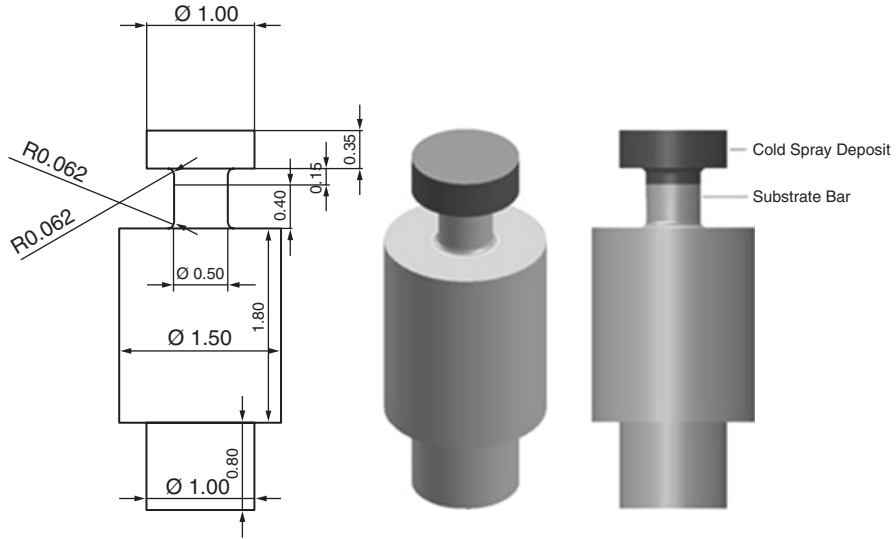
“Glueless” bond strength test specimen mechanical drawing (dimensions in inches)
